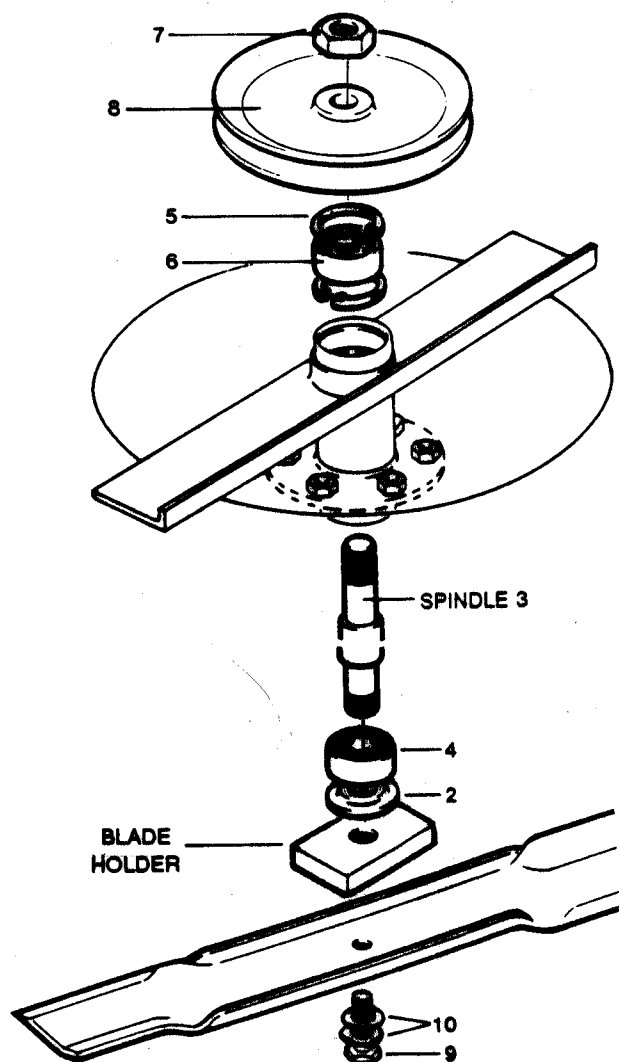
REBUILDING SPINDLE ASSEMBLY
